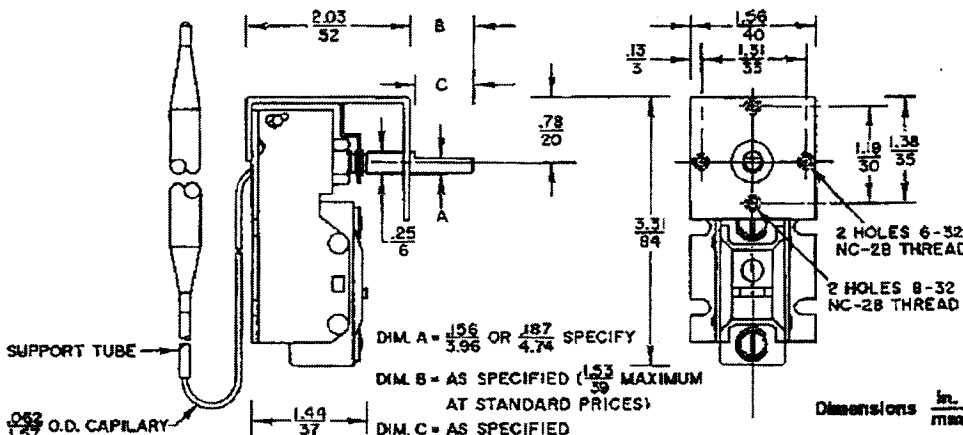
Center support, front mounting bracket, optional at extra cost.
